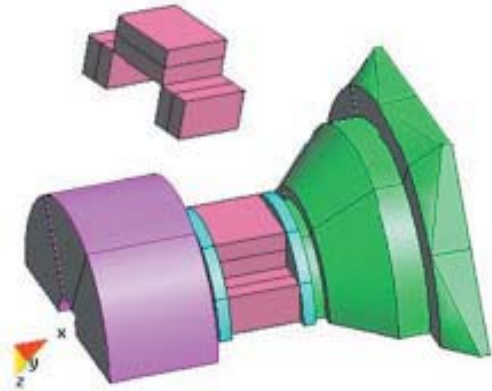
Stacked bar geometry shown separately and in (half) transducer assembly.
